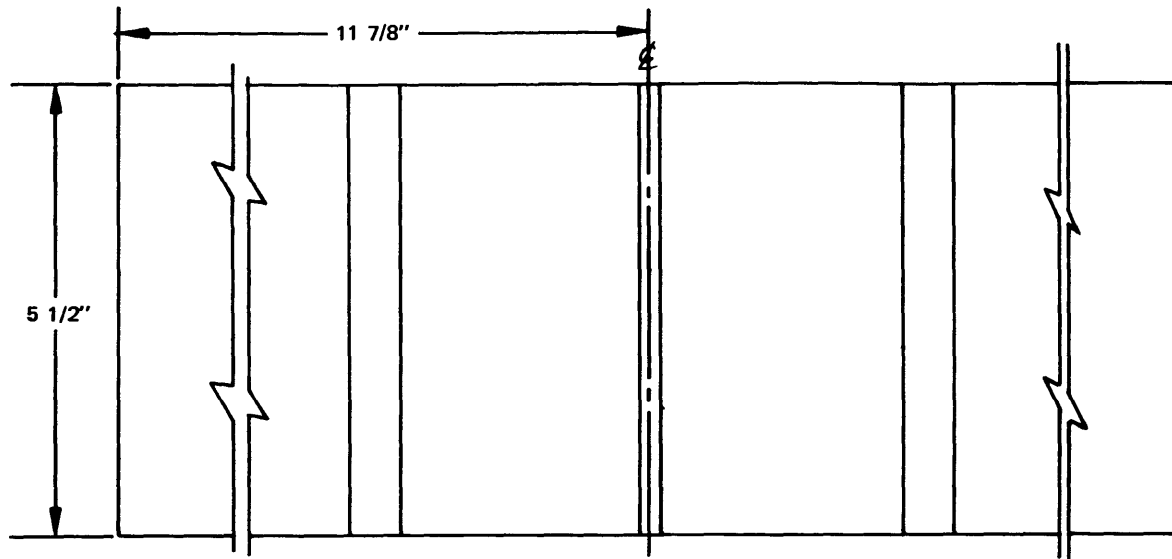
Notched Welded Cantilever Plate Specimens
